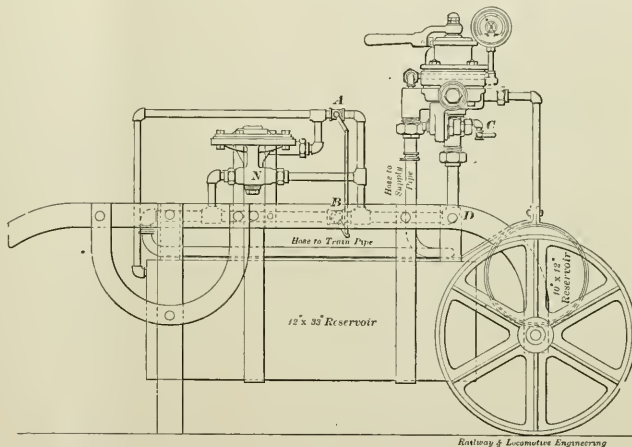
TRIPLE VALVE TESTING DEVICE MOUNTED.
